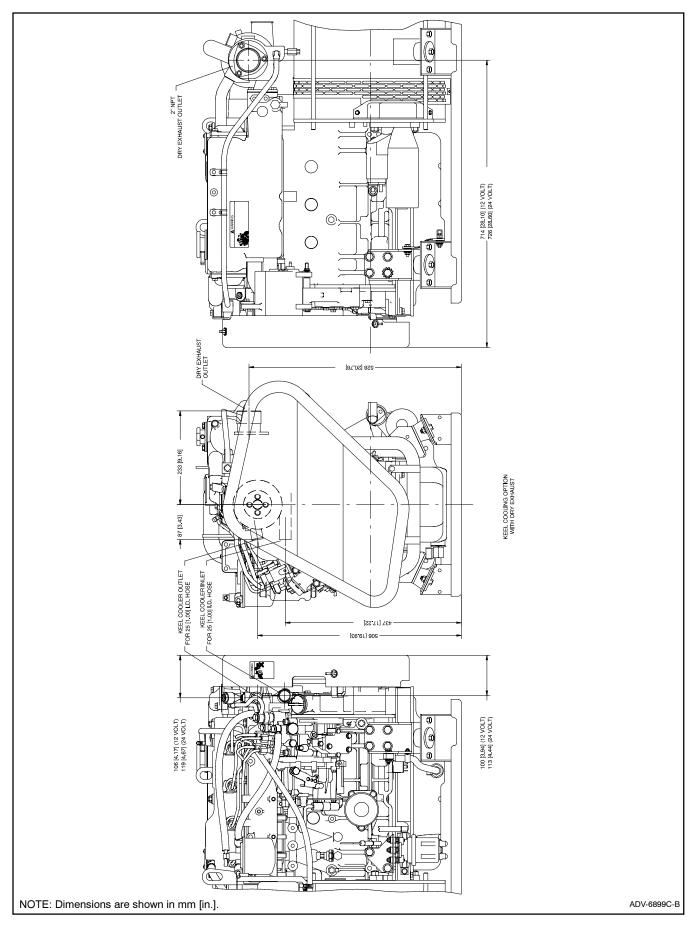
Dimension Drawing, 23/24EOZD and 20EFOZD with Keel Cooling
